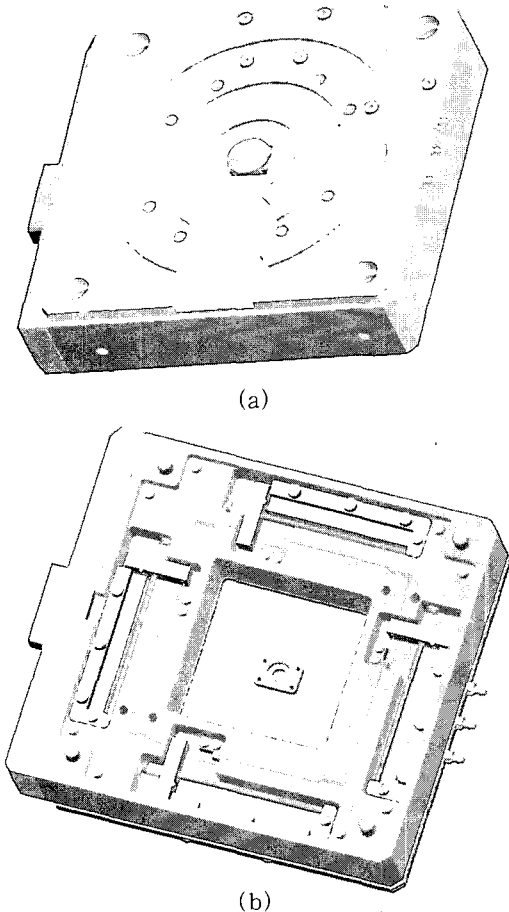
(a) Total assembly of the planar scanner: showing the vacuum compatible sample chuck (b) Total assembly of the planar scanner: showing PZT actuators
